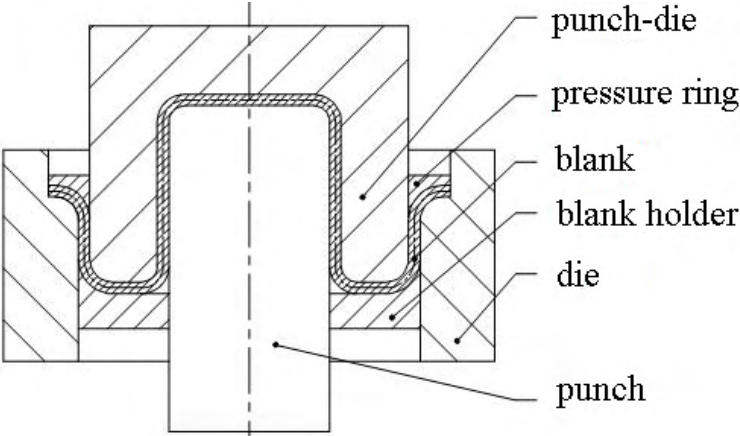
Schematic of Sheet Metal Forming in a Press [3]
